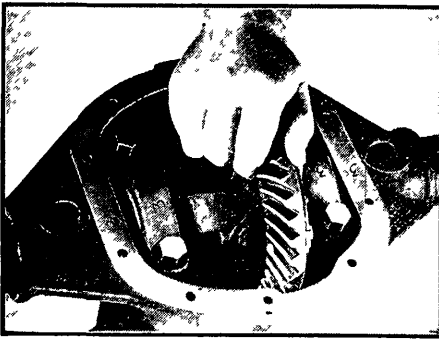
Show how bearing caps should be installed according to numerals on shim-adjusted differential units
